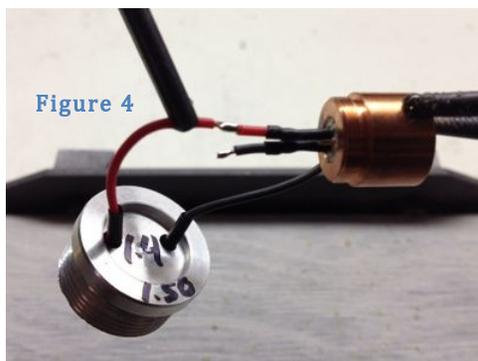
Cut the supplied 3/64" diameter heat shrink tubing into two pieces about 1/4" long and slip them over the driver module leads.
